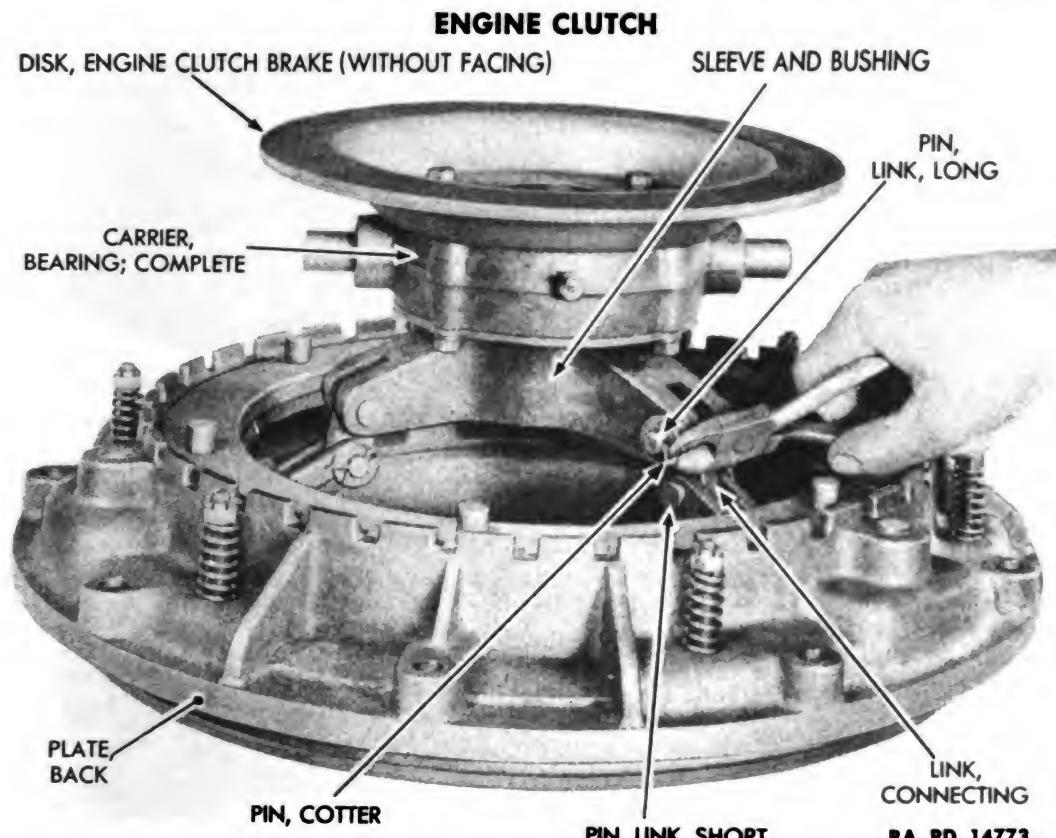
Engine Clutch Brake Disk, Carrier and Sleeve, and Bushing; Removal
